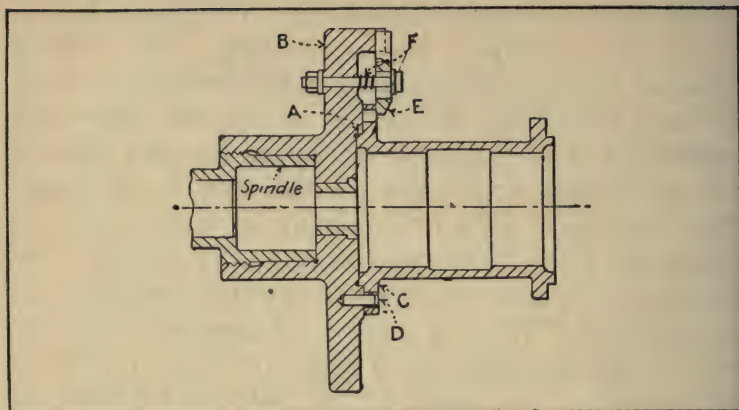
FACE-PLATE FIXTURE FOR A HUB FLANGE
